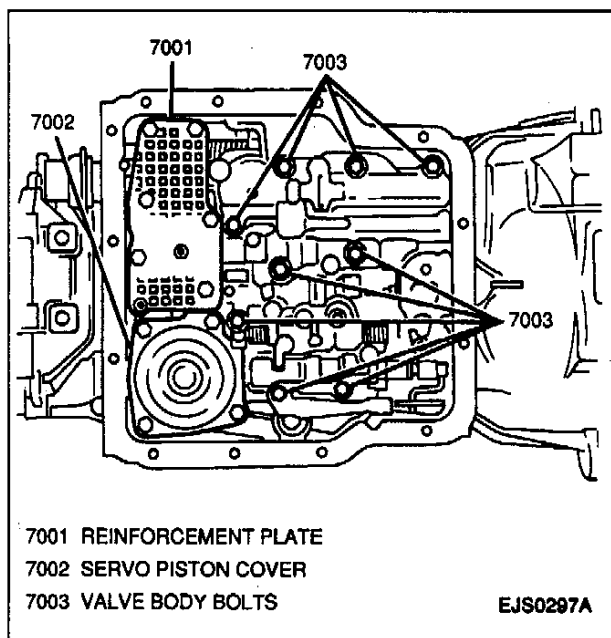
Reinforcement Plate, Servo Piston Cover and Valve Body Bolts (3L30, 3-Speed)
